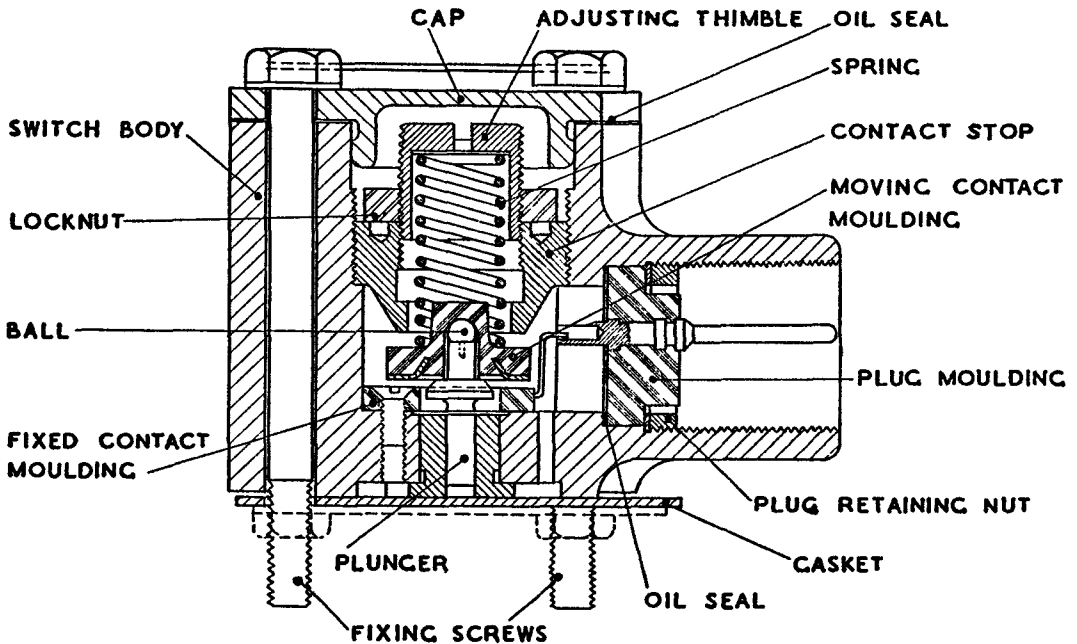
Sectional view of Rotax type propeller pressure cut-out switch
